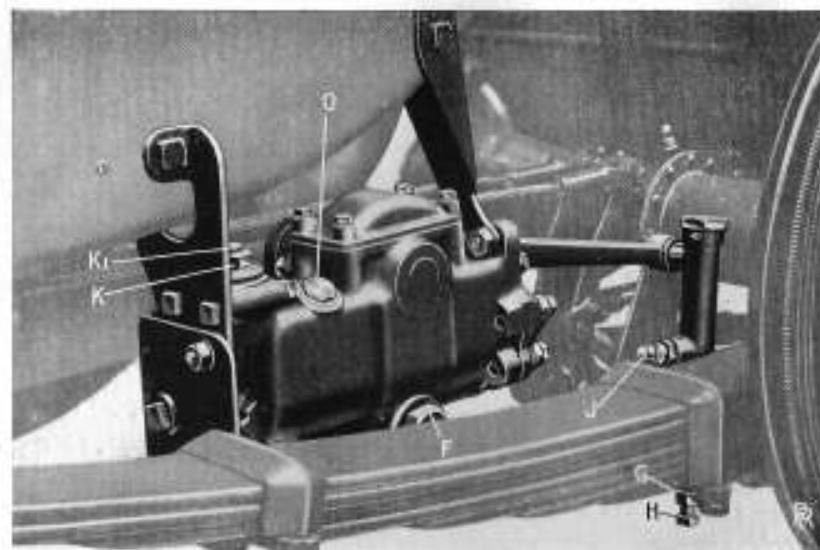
REAR HYDRAULIC SHOCK DAMPER.
